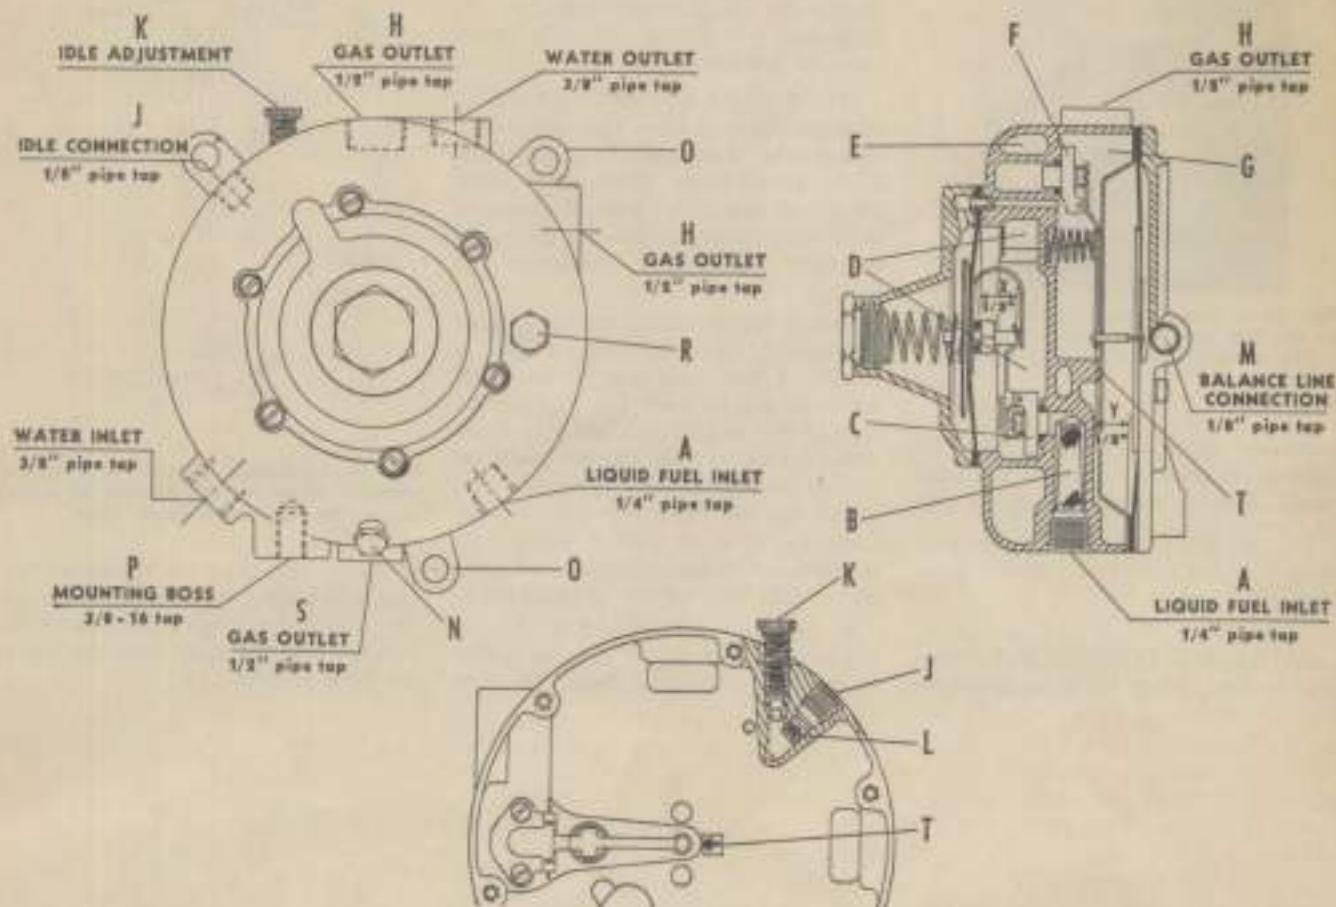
Model W Ensign LP-Gas regulator of similar construction to that used. For exploded view refer to Fig. 67.
